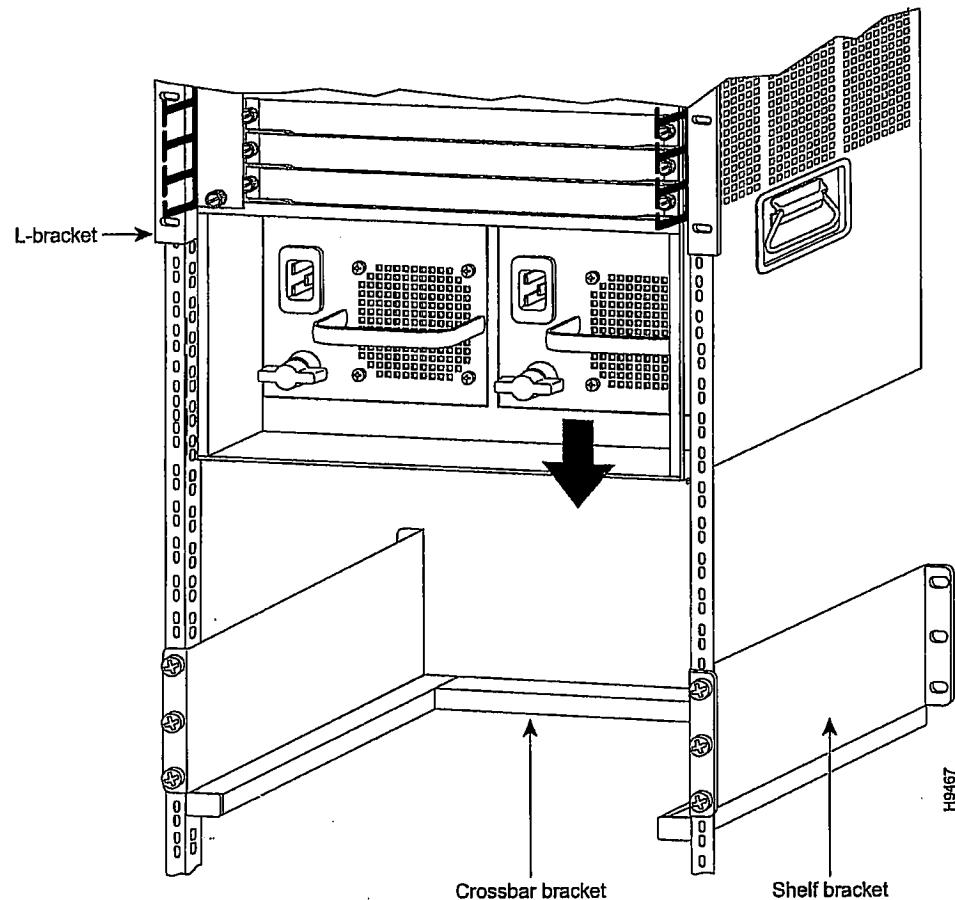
Catalyst 5500 Switch: Attaching L Brackets and Cable GuidesStep 4 Install the chassis in the rack as follows:
